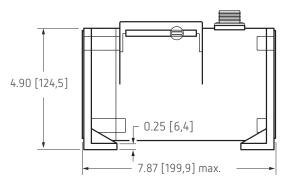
Outline Drawing (18 oz. cable tension only)
